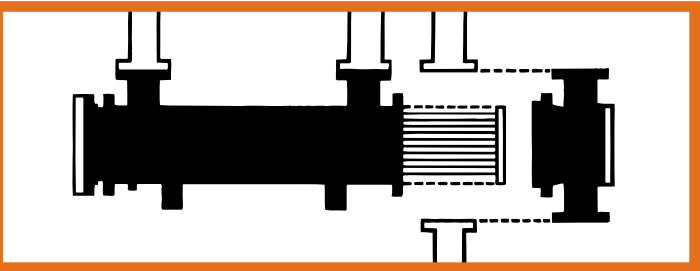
Removable tube bundle permits easy examination of tubes and shell interior.
